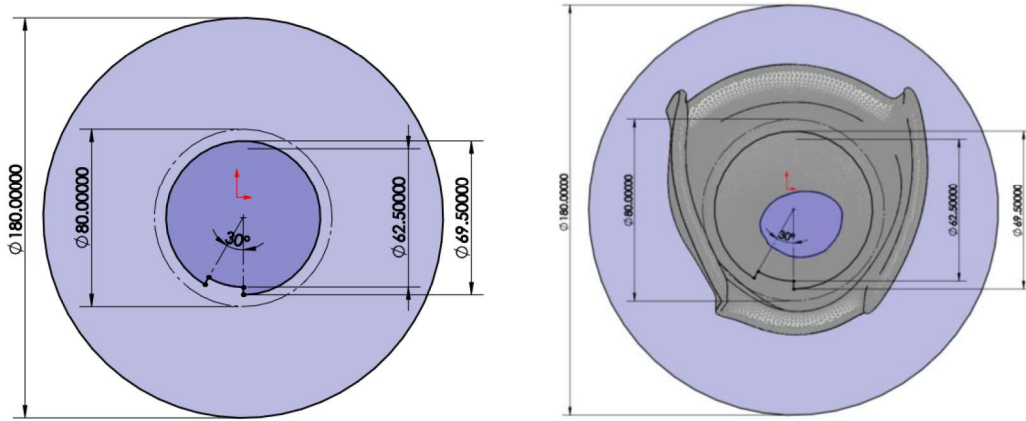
Extrude-Cut sketch to remove the remaining socket
